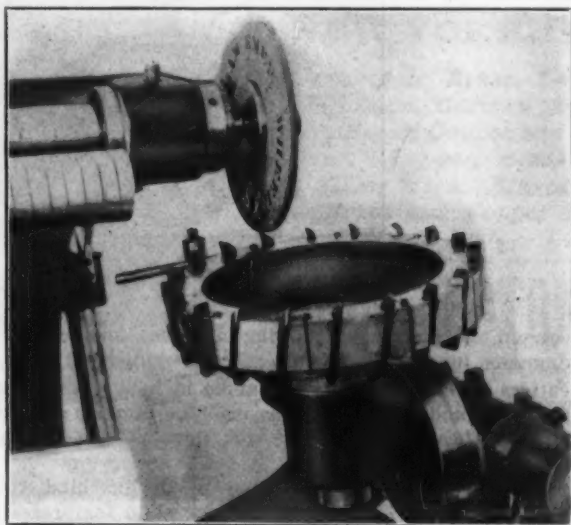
Showing a Large Inserted Tooth Face Mill in the Sliding Head.
